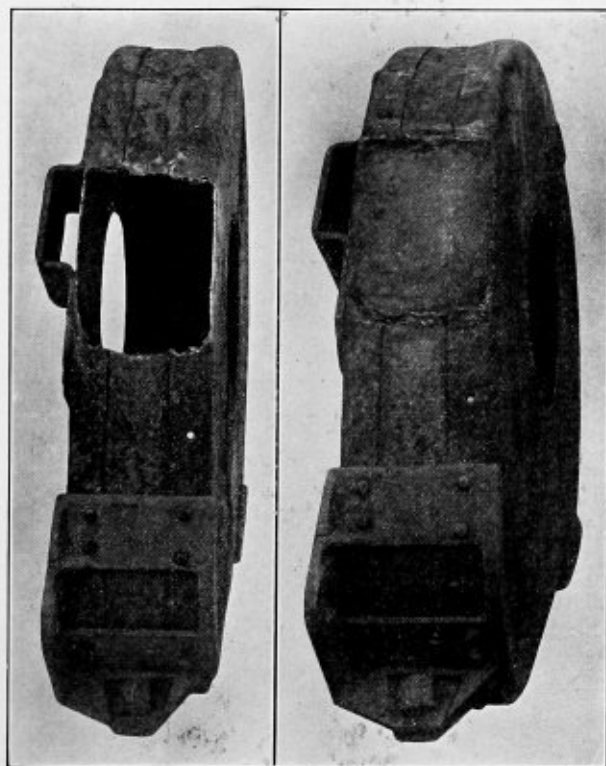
Hole in Gear Case, Cleaned Up and Ready for Welding
